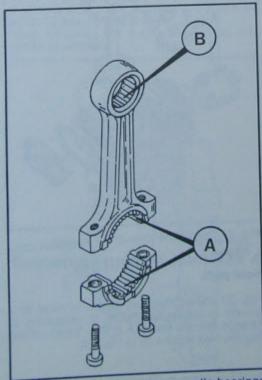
A = Single rows or needle bearings B = Caged needle bearings
